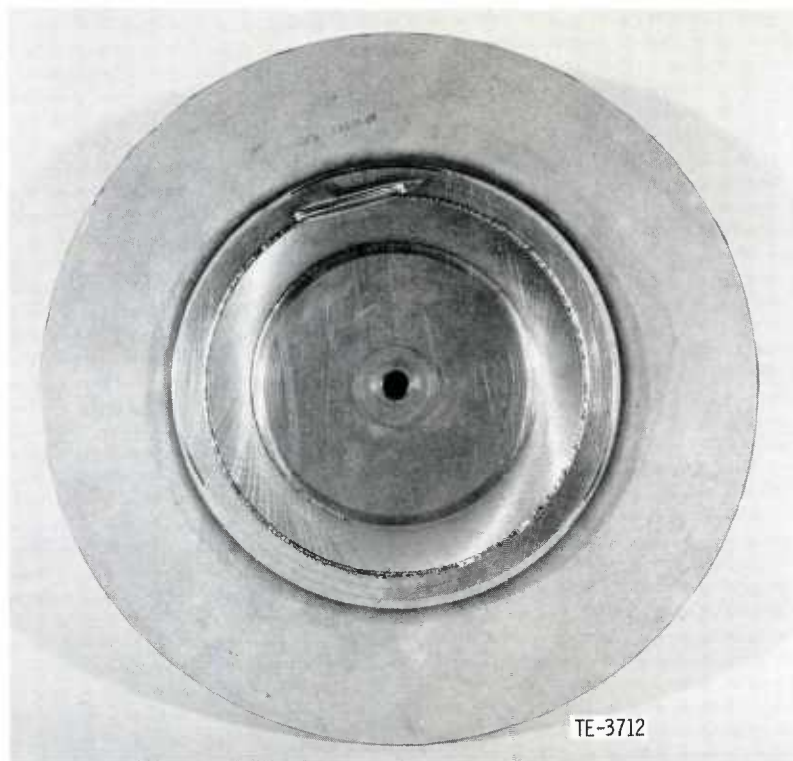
Hub/shell assembly with laser-welded seam and final EB-welded closure.
